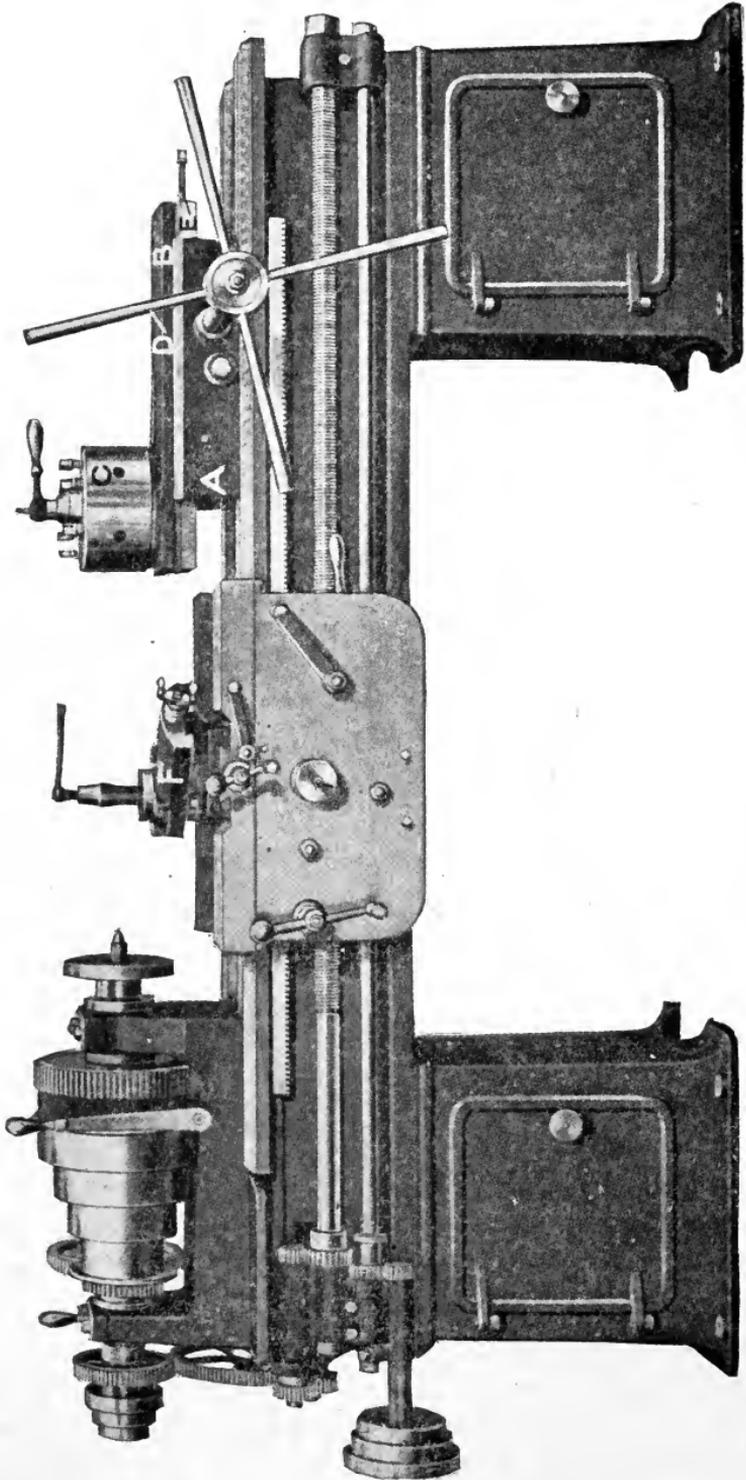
Engine Lathe with Hand-Revolved Turret Mounted on Laterally Moving Slide
